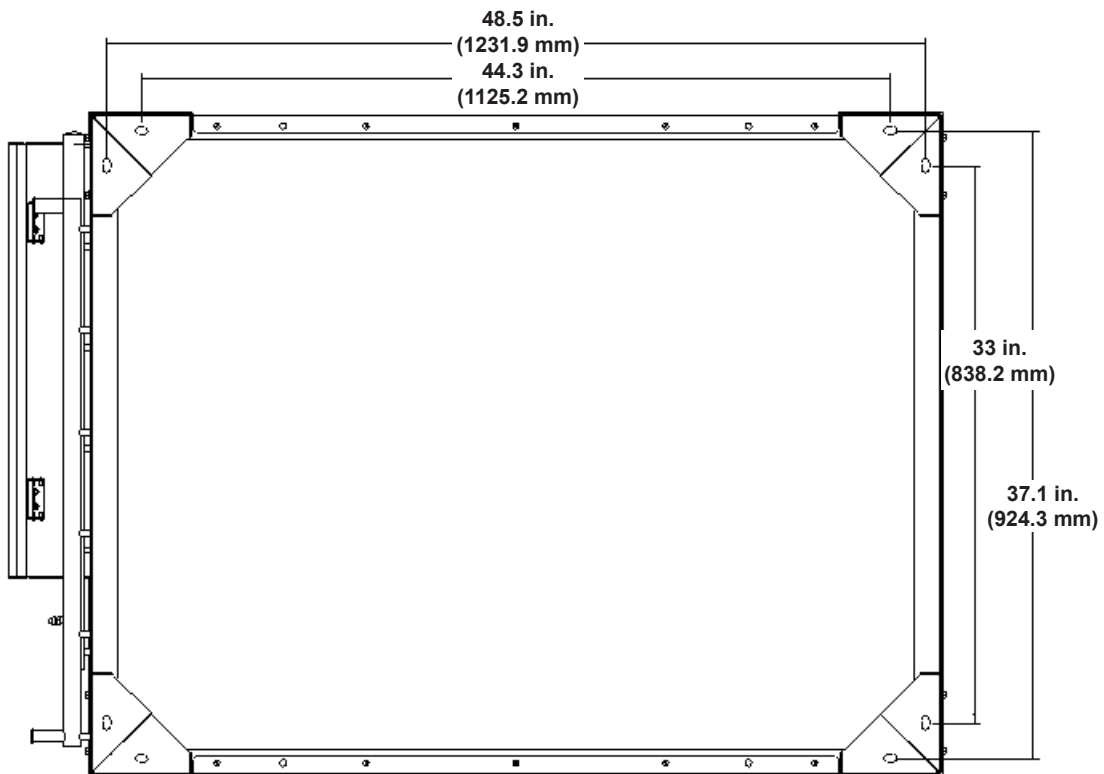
Condenser Mounting Interface (condenser inlet side looking up), SRCOOLDXRW25 (horizontal installation)
